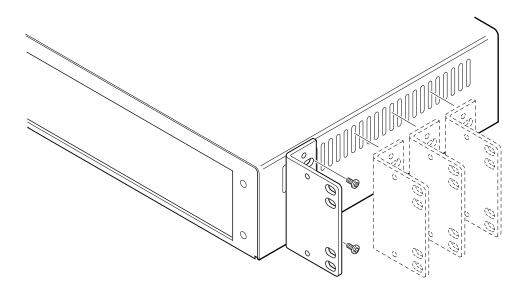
Attaching Mounting Flanges for the 21-inch Equipment Racks
